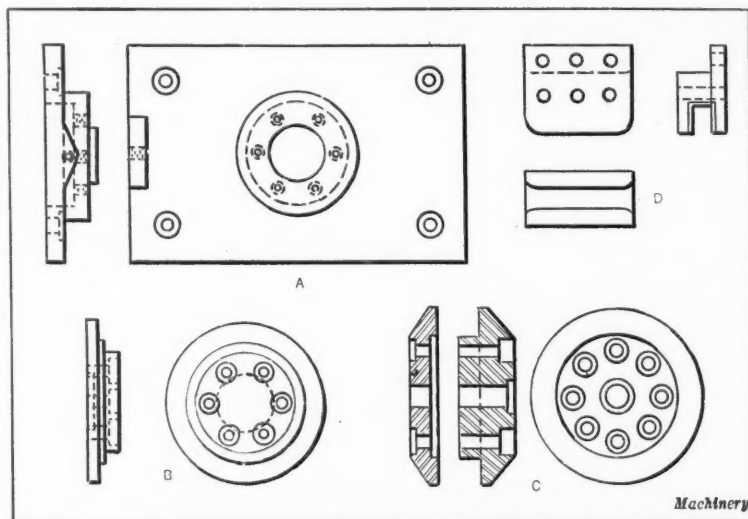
Details of Parts of Winding Machine Shown in Fig. 2
